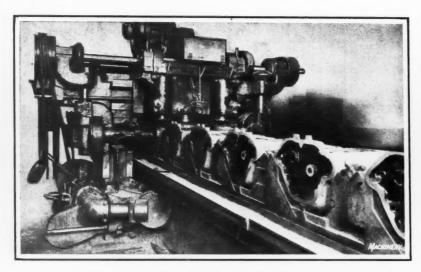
Operation in which Eight Milling Cutters are employed for milling Various Surfaces on the Crankcases
